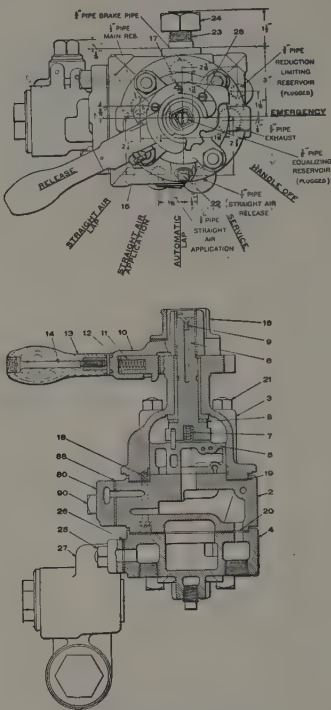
Motorman's Automatic Brake Valve, Type M-24.
